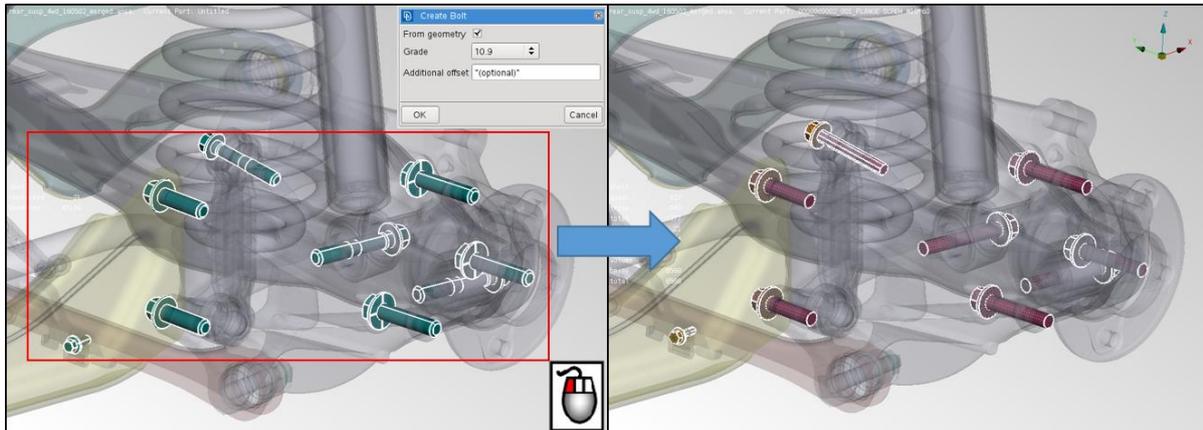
Converting multiple CAD generated bolts in a rear suspension into detailed solid meshed counterparts, with a few clicks via the automatic bolt script toolbar. Correct attributes, material and pre-tension is also set by the script.
